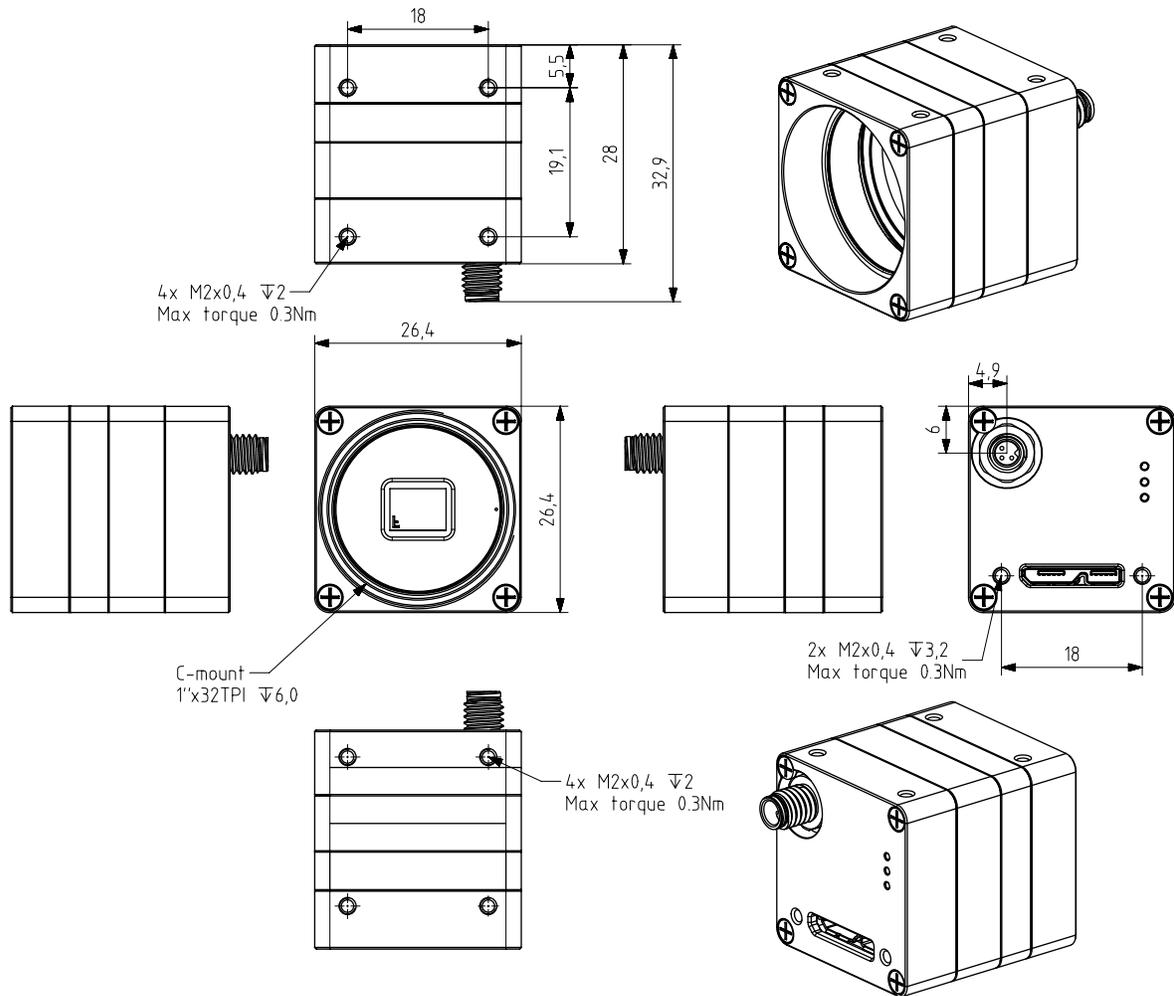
Dimensional drawing of MQ013xG-E2-S7
